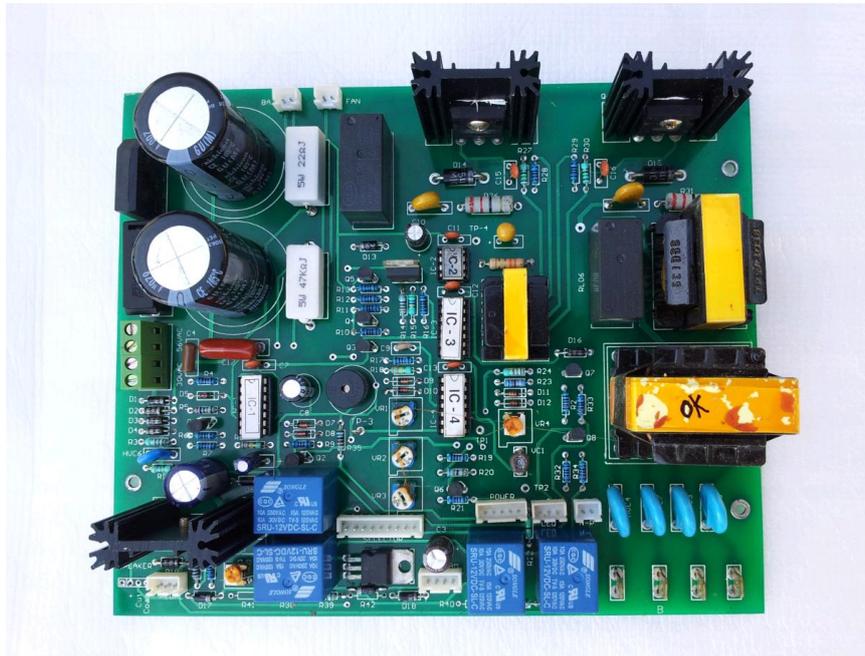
Component Loaded Electro Surgical Diathermy PCB
